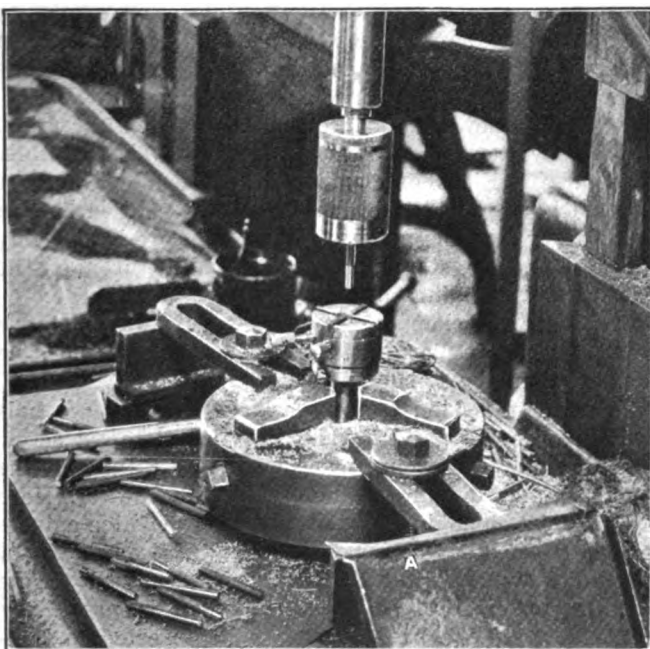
THREADING STUDS IN A DRILLING MACHINE
